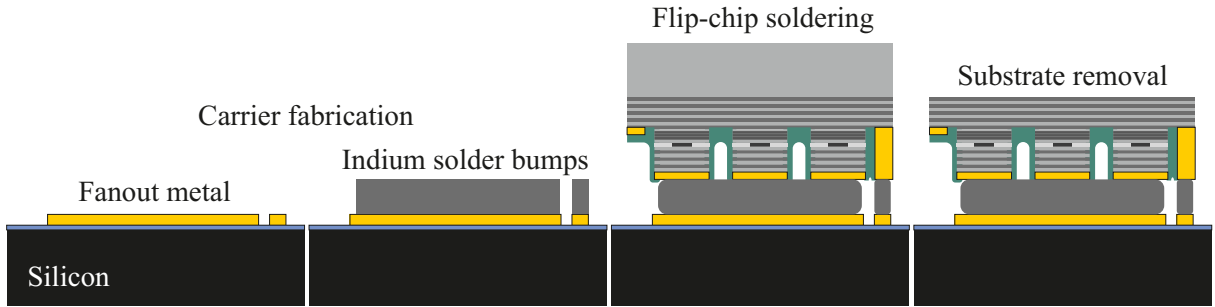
Fabrication of silicon laser chip carriers with fanout tracks and indium solder bumps. By flip-chip soldering, laser chip and chip carrier are combined. Finally, the substrate on the back side of the laser chip is removed.
